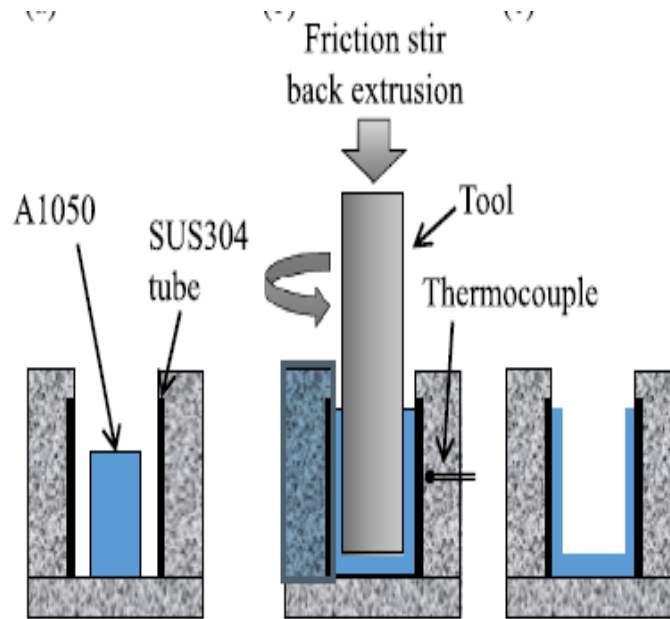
11 frictional stir back extrusion setup and tool rotational direction (Hangai 2017)
